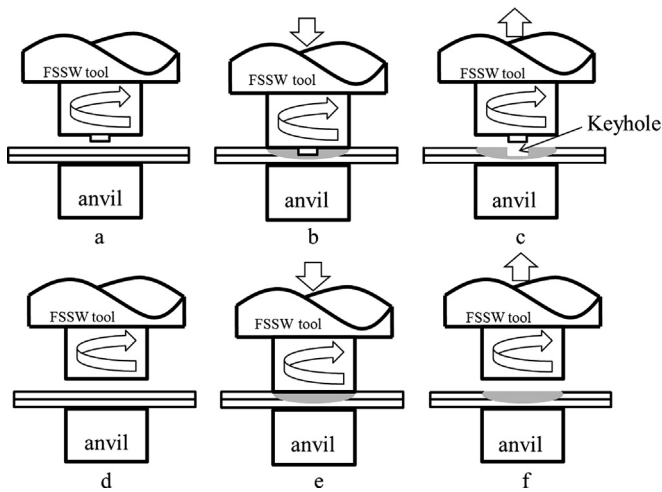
The friction stir spot welding process. (A–C) Traditional FSSW process using a tool with a pin. The resulting keyhole defect is illustrated. (D–F) FSSW process using a pinless tool. The lack of the keyhole defect is illustrated.
